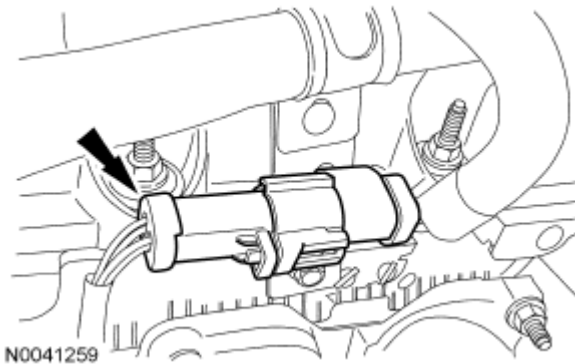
Locating HO2S Electrical Connector To PSP Bracket
